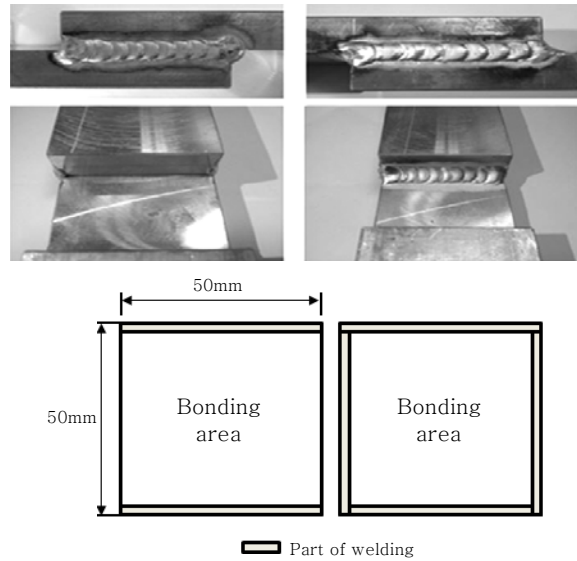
Schematic of the two-sides and four-sides welding specimens
